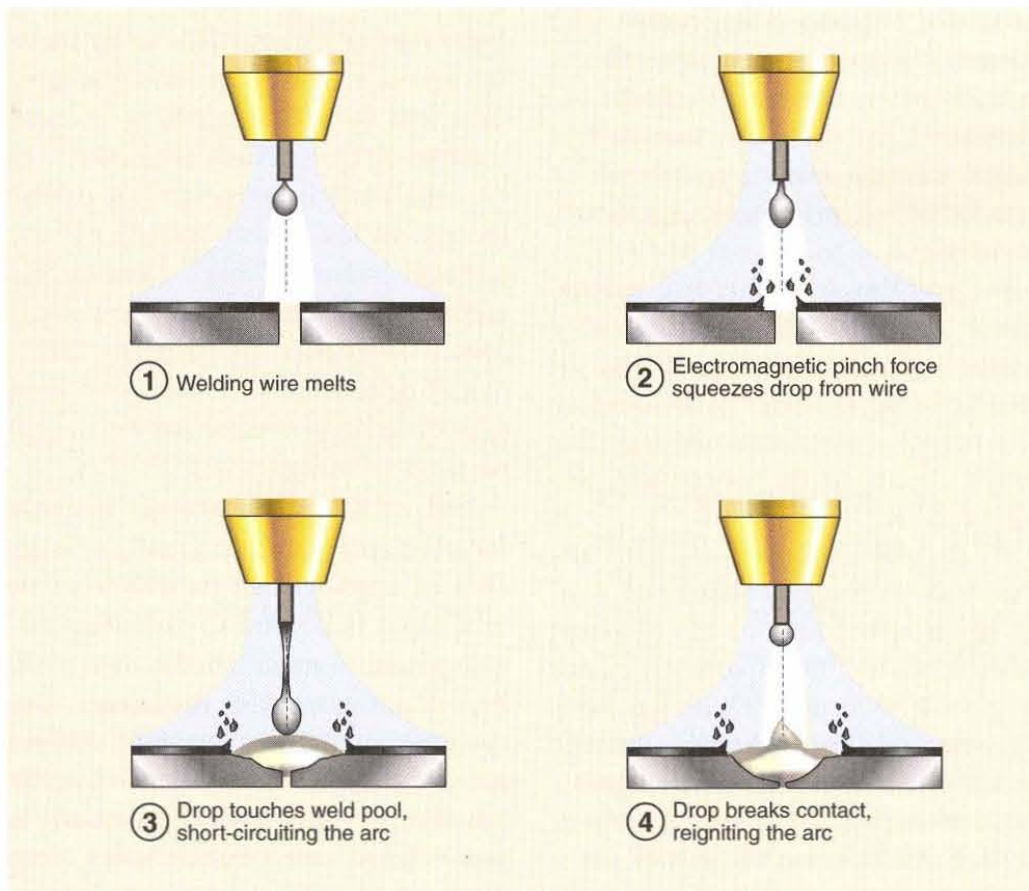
Short circuiting transfer is practical for all welding positions, especially where control of the weld pool is difficult.
